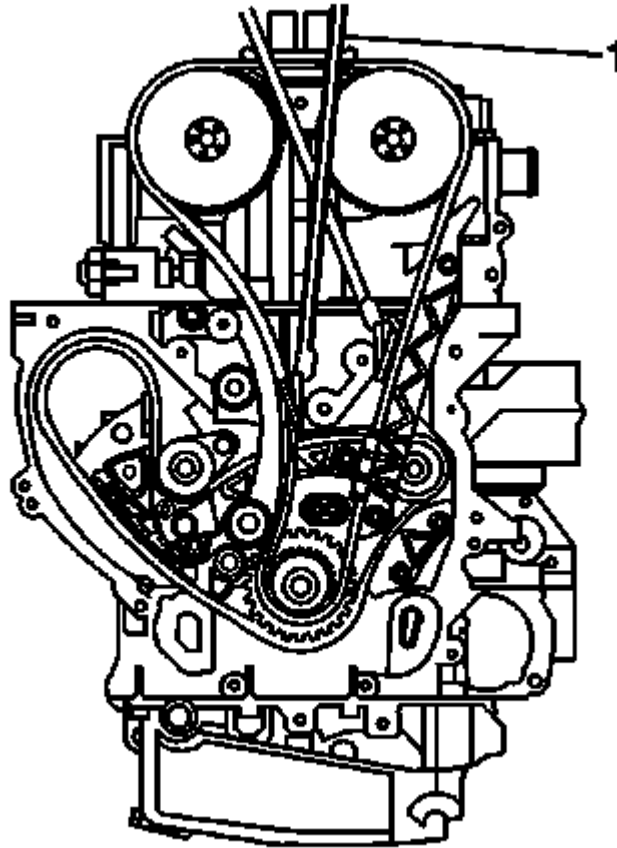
Identifying Timing Chain & Chain Retention Tool
